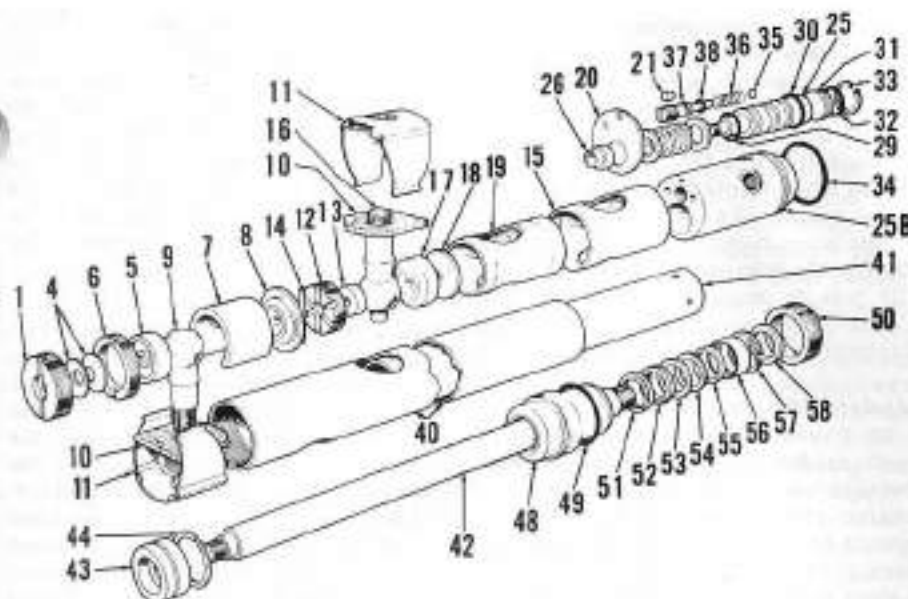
Exploded view of non-reactive type power steering cylinder typical of that used on later model 880 and 990 tractors and all other models included in this manual. Refer to Fig. 27 for cross-sectional view of unit and for legend.
